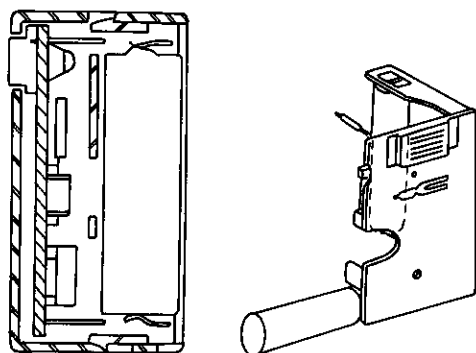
Cross section and frontal view of the MiNi's strobe unit
